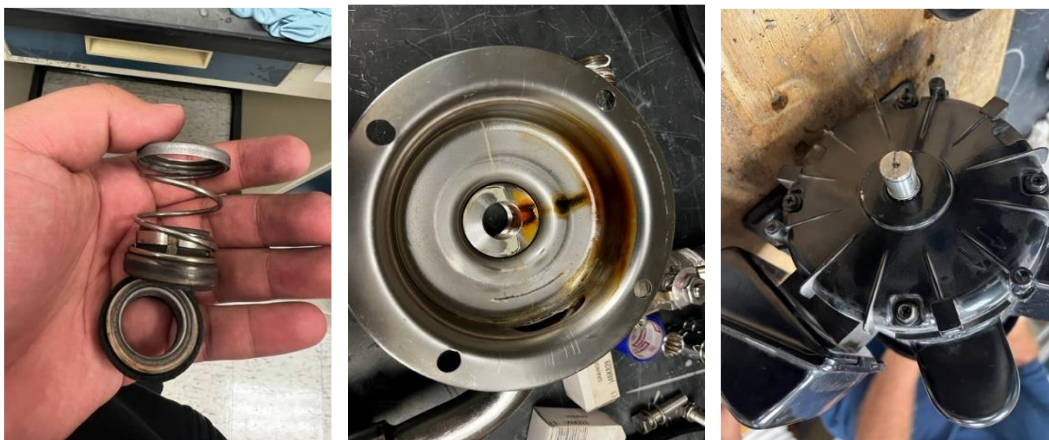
Slip ring (left), volute showing chemical corrosion (center) and pump's shaft (with casing removed) (right).
